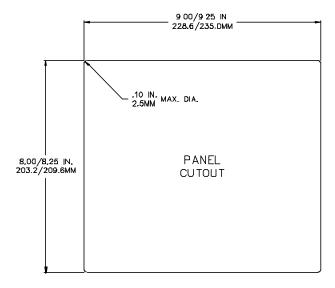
465 Panel Mount Cut-Out Dimensions
